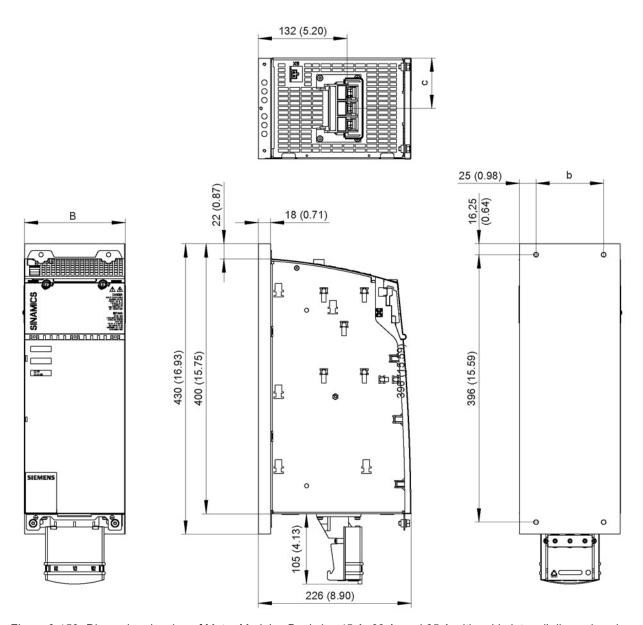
Dimension drawing of Motor Modules Booksize 45 A, 60 A, and 85 A with cold plate, all dimensions in mm and (inches); example for Motor Module 45 A
